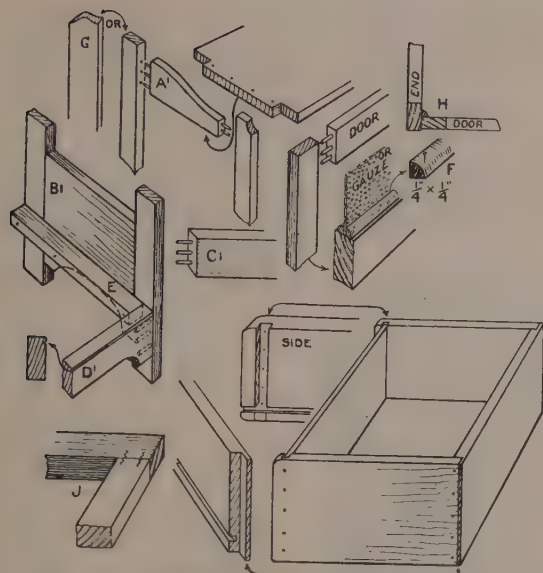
VARIOUS DETAILS OF CONSTRUCTION.
